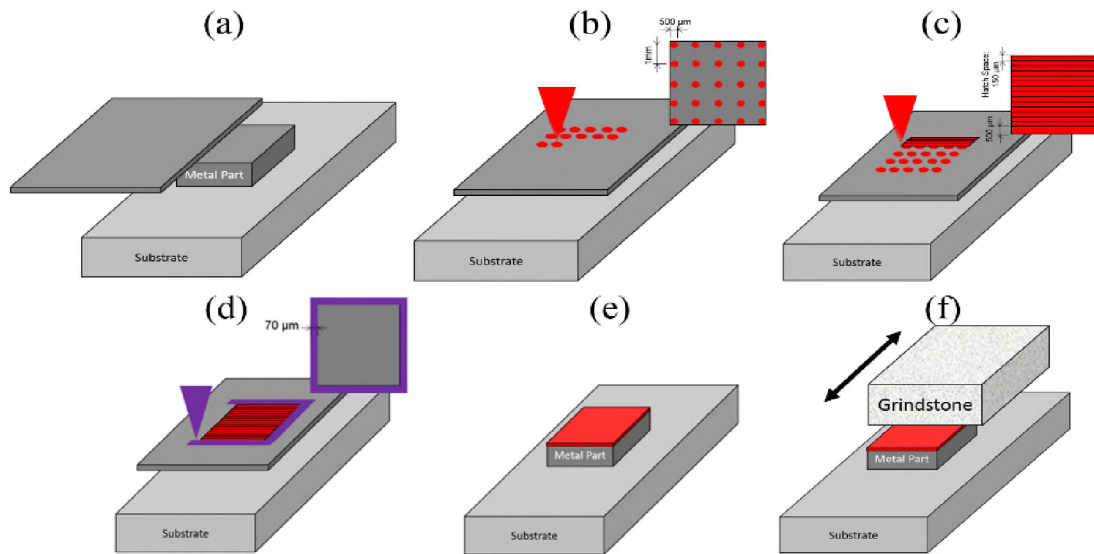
Schematic illustrations of the six steps in the LFP process for the fabrication of each layer: (a) foil feeding; (b) spot welding; (c) pattern welding; (d) contour cutting; (e) excess foil removing; and (f) surface flattening.
